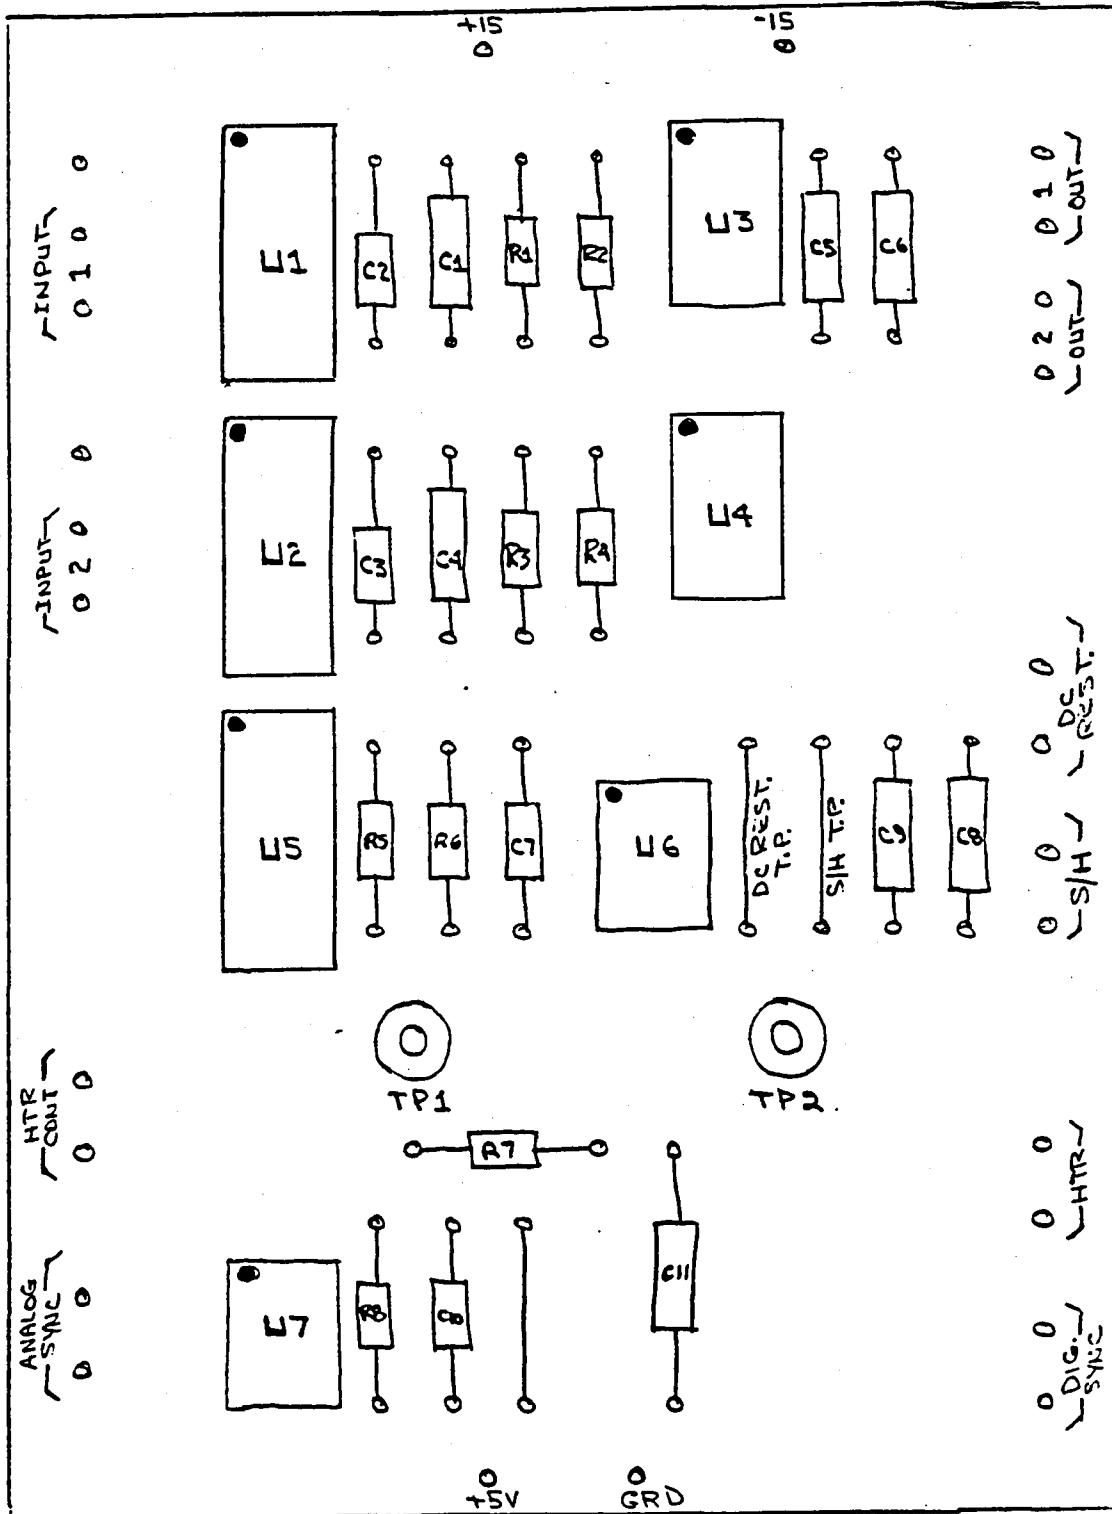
COMPONENT LAYOUT FOR S/H BOARD
